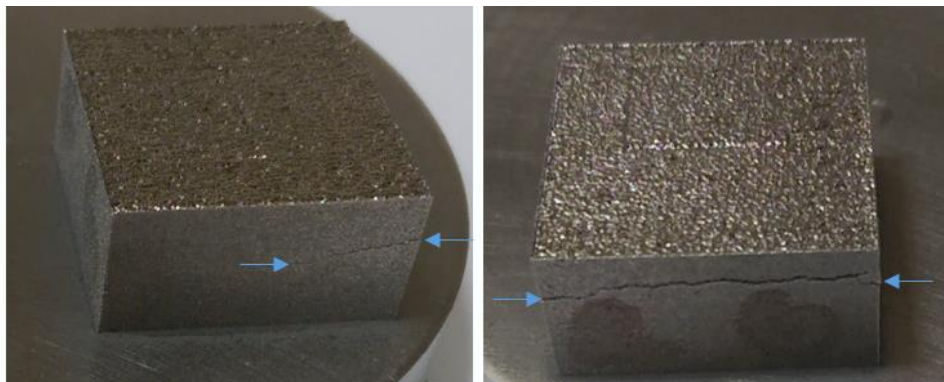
Photographs showing cracking in test piece P5 - a) right hand wall and b) rear wall – indicated with blue arrows.
